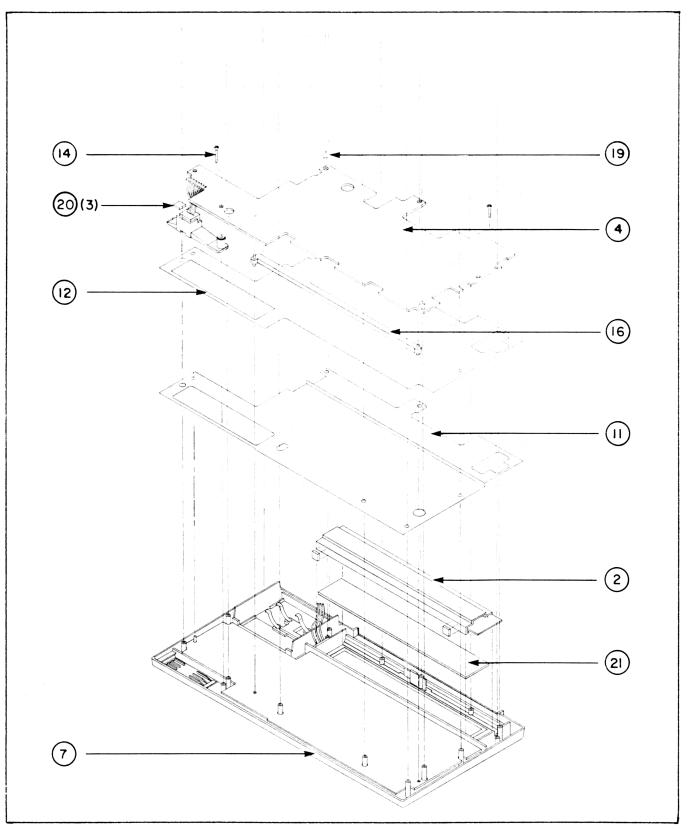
HP-75 Portable Computer Exploded View (Continued)
